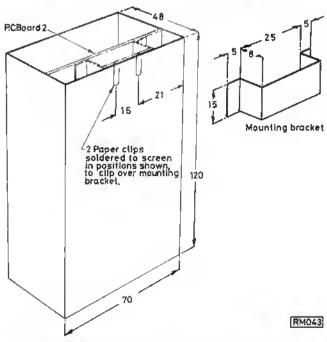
Details of the tinplate screen for Board 2. The small bracket is soldered to the copper earth tracks at the top of Board 2
